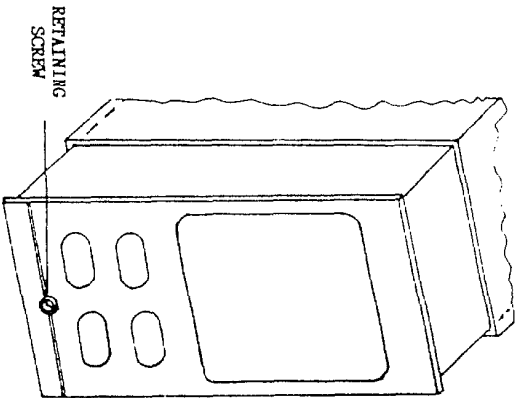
REMOVAL AND REPLACEMENT OF 3100 WITHIN HOUSING.
